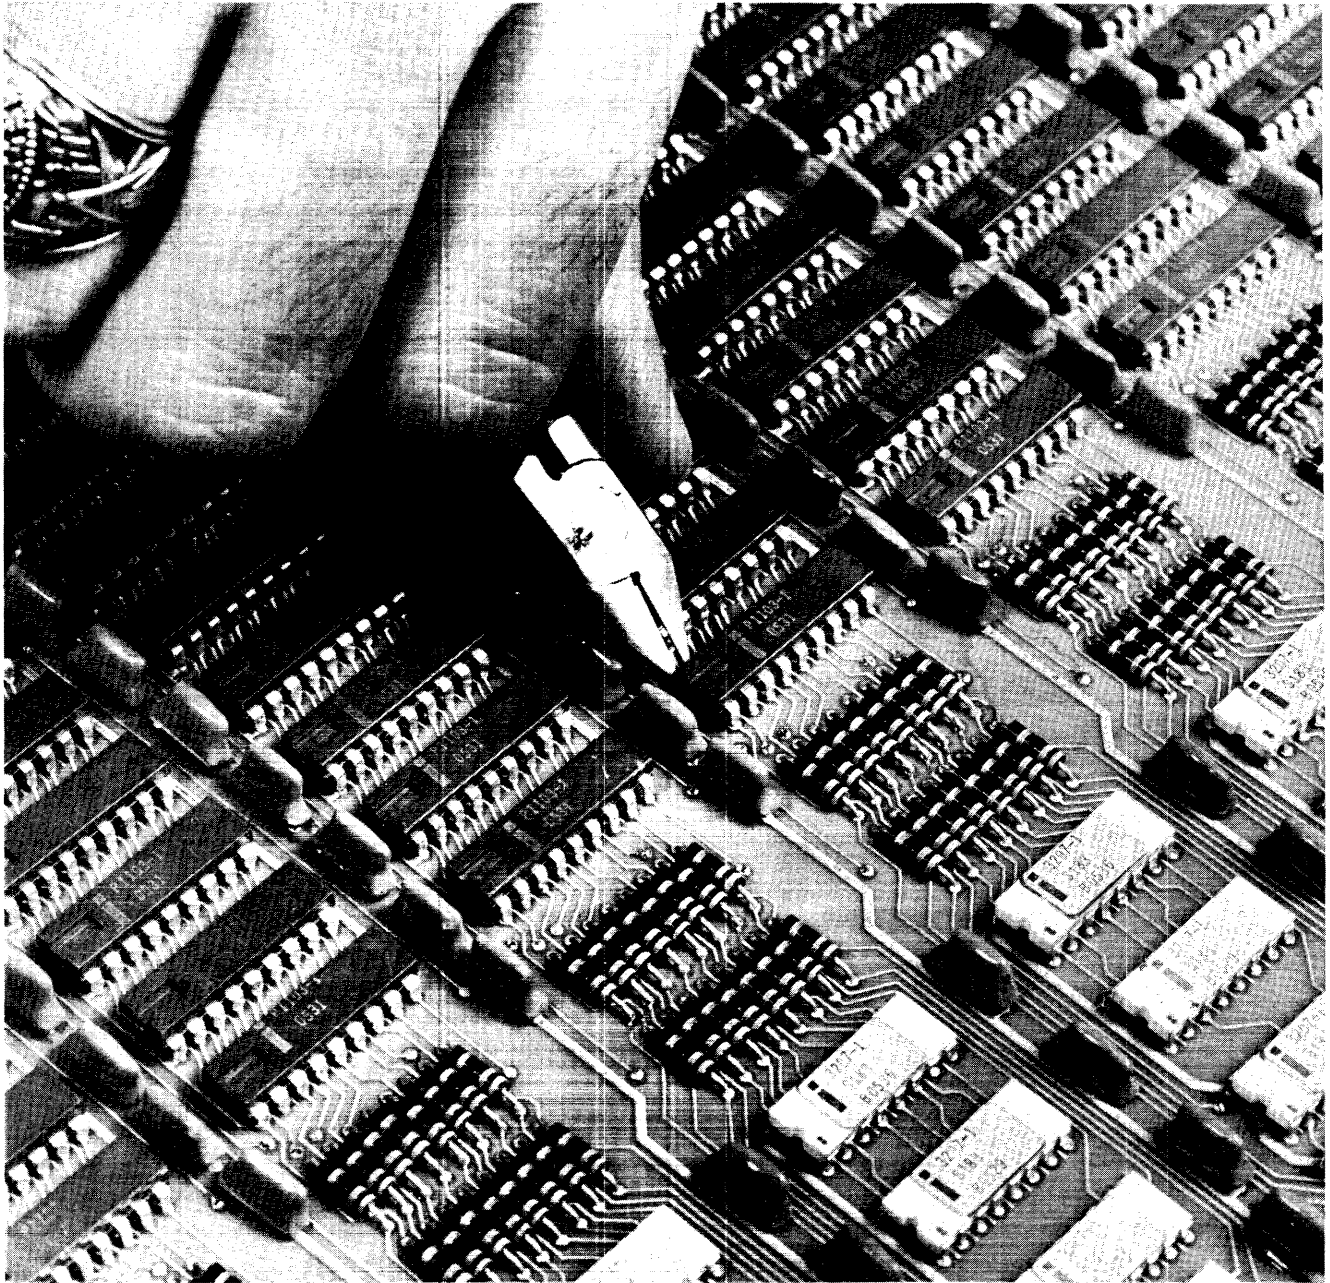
Top View of Component Connection Made Directly to Inner Layer
